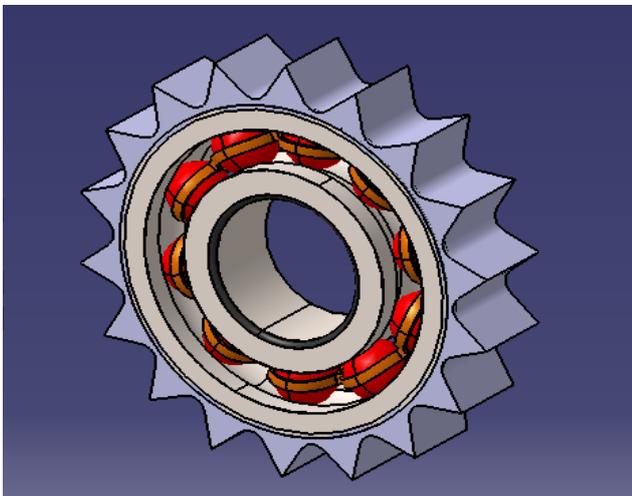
Unidirectional Ball Bearing assembled to Sprocket
